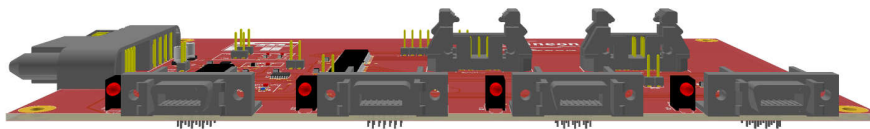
MDR Mainboard PCB - Front edge of the board
